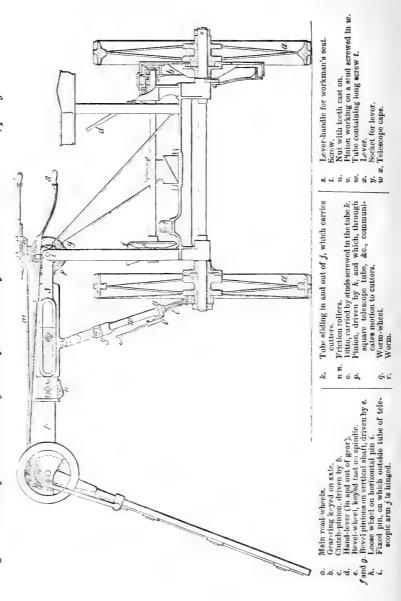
Plan of Hornsby and Sons' Hedge-cutting and trimming Machine.
